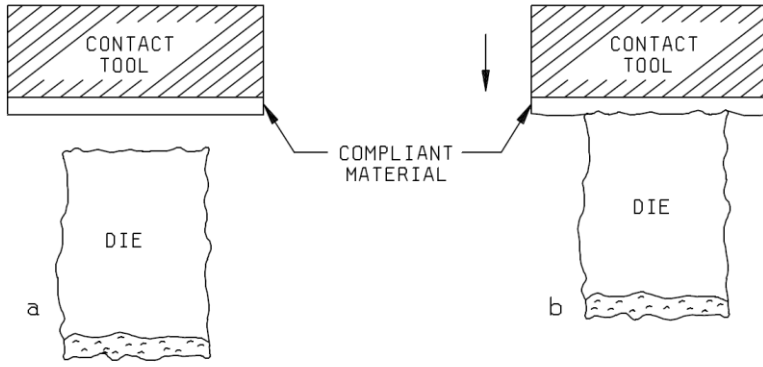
Compliant interface on contact tool distributes load to the irregular edge of the die.
